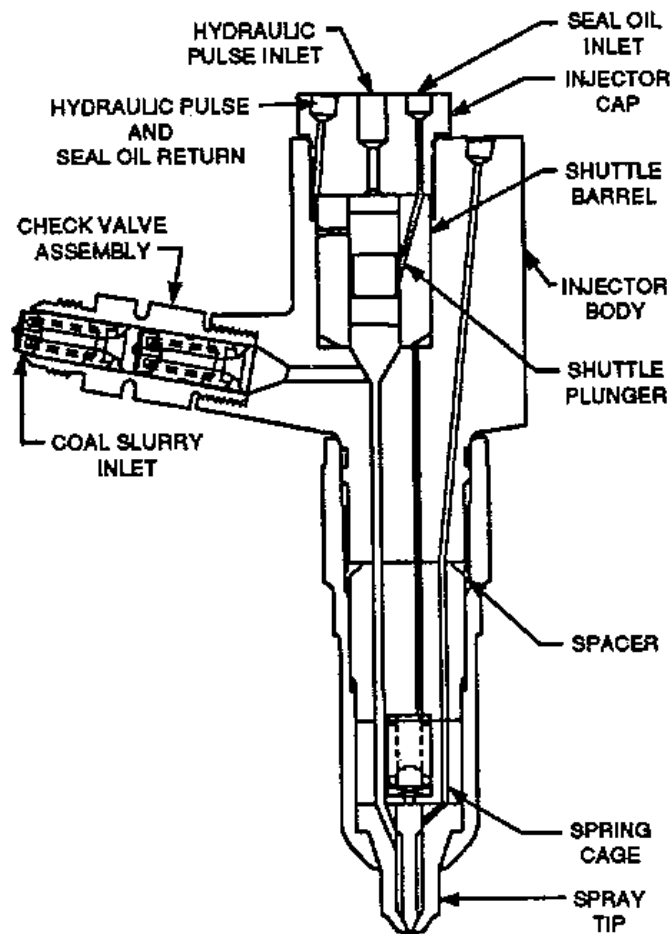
Integrated shuttle piston and nozzle injector assembly developed by SwRI^[55]
